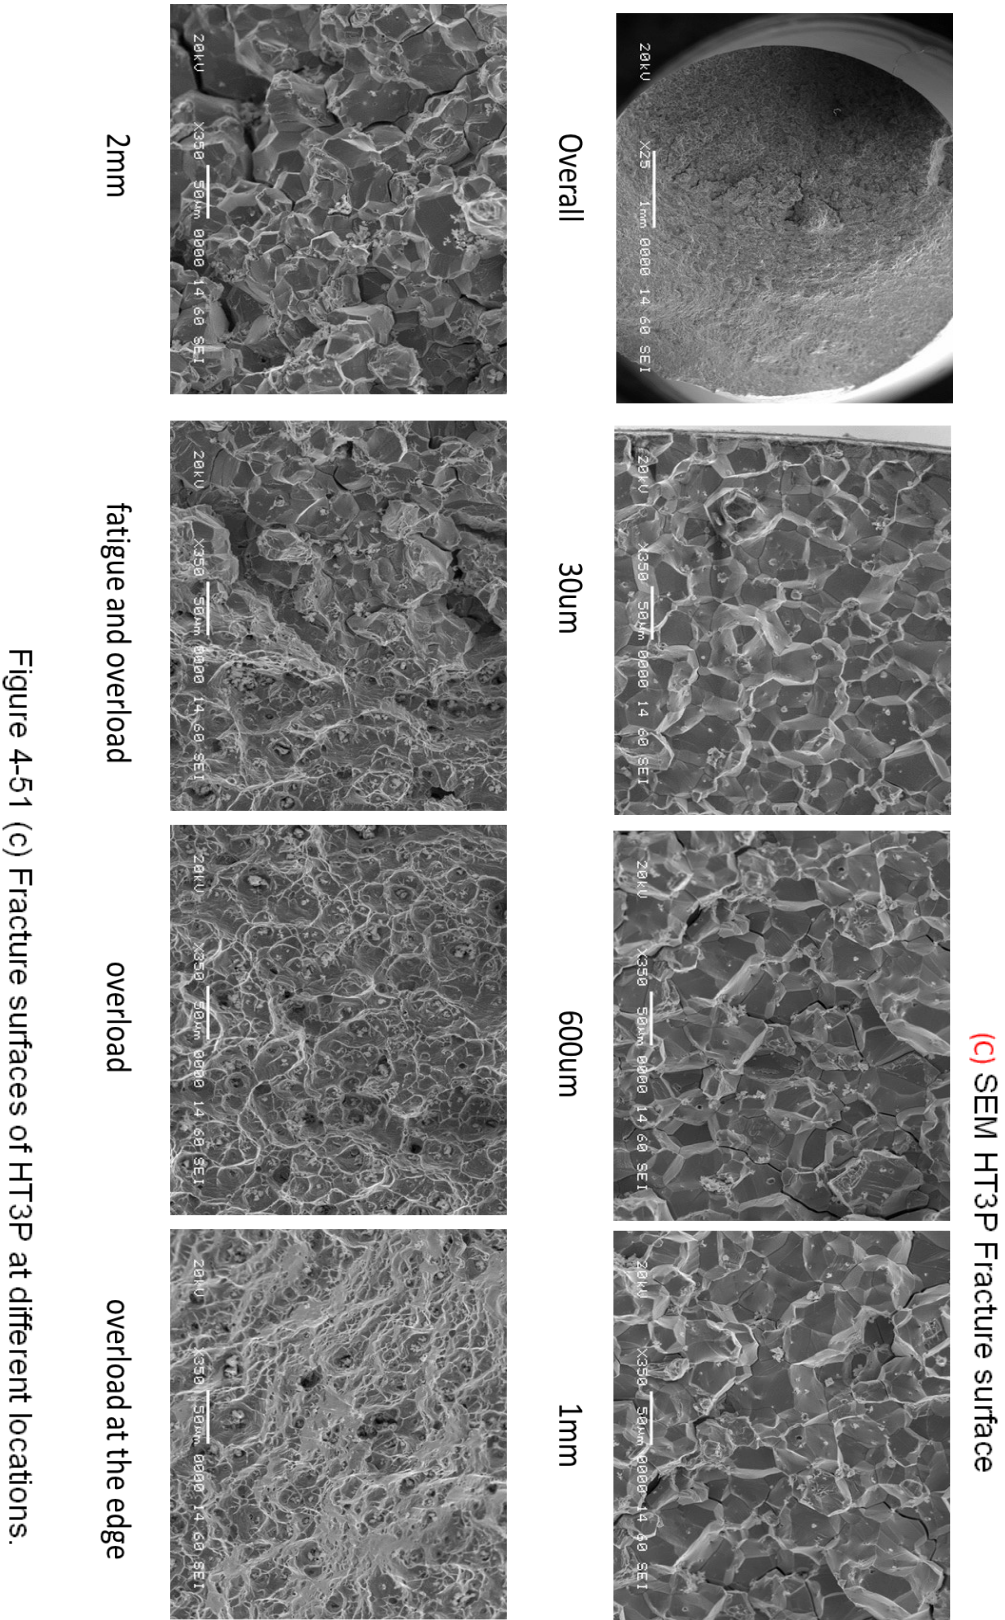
(c) Fracture surfaces of HT3P at different locations.
